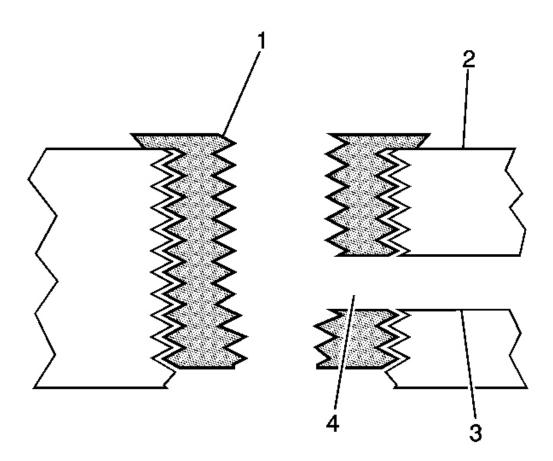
Inspecting Insert For Proper Installation - Tapered Thread Courtesy of GENERAL MOTORS CORP.
